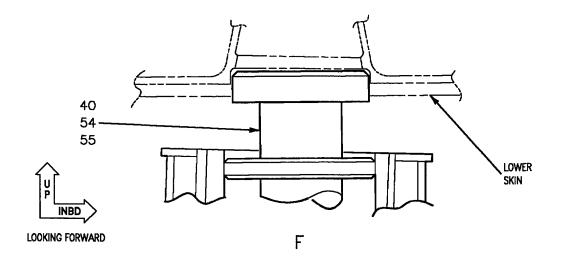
Boring Upper and Lower Skins, Installation and Boring of Outboard Pylon Post Bushing (Sheet 4)
